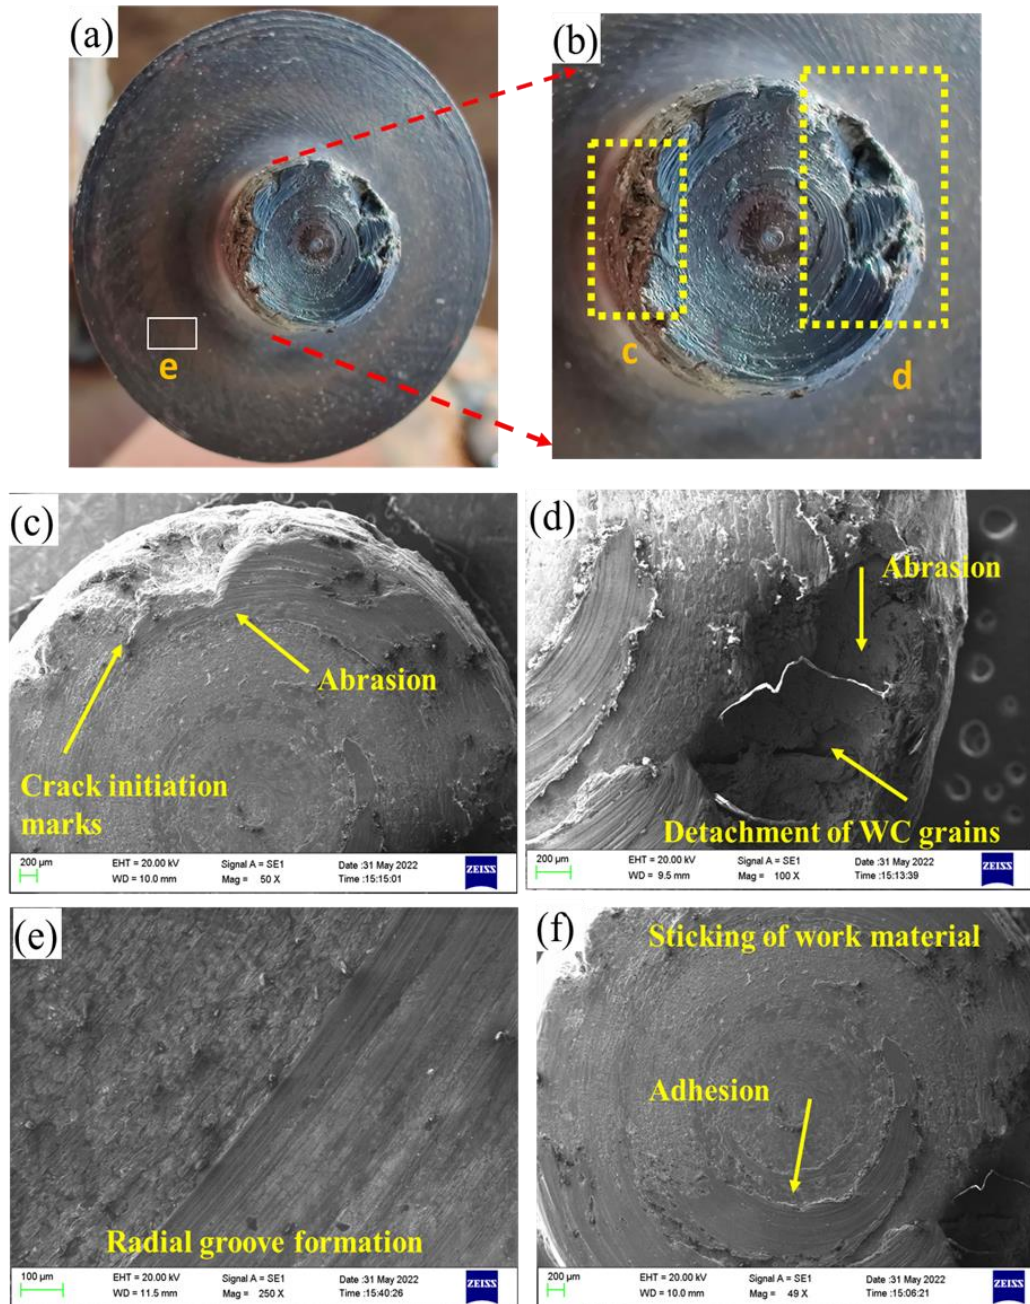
SEM image of face wear of 'tool A' pin depicting (a) entire tool face with shoulder (b) enlarged pin face (c) pin periphery demonstrating crack initiation and abrasion (d) material uprooting and cavity formation (e) radial groove formation in shoulder (f) sticking of work material in pin due to adhesion
